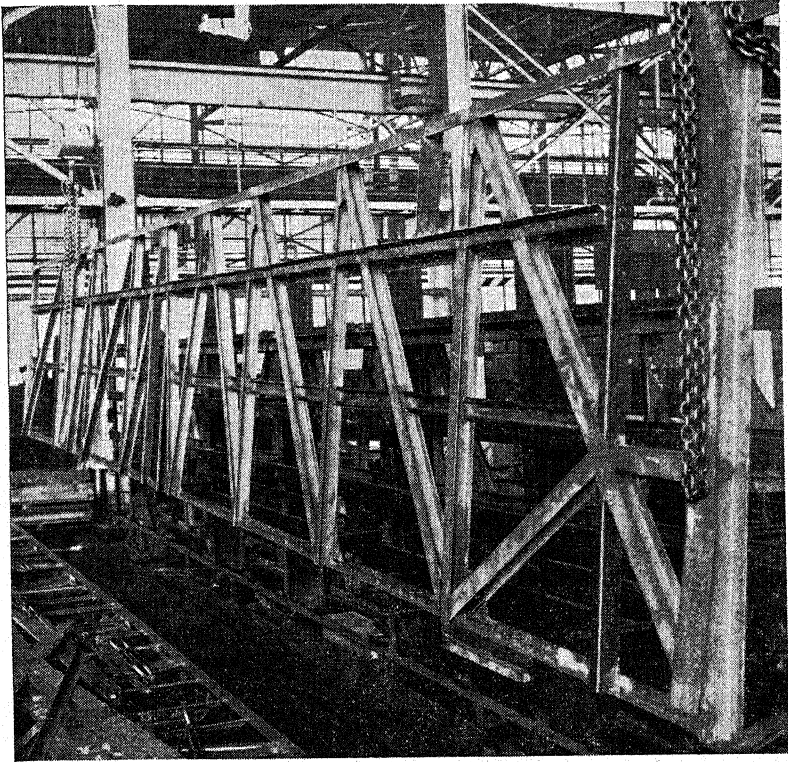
Diesel-electric locomotive side frame just after completion of arc welding.
